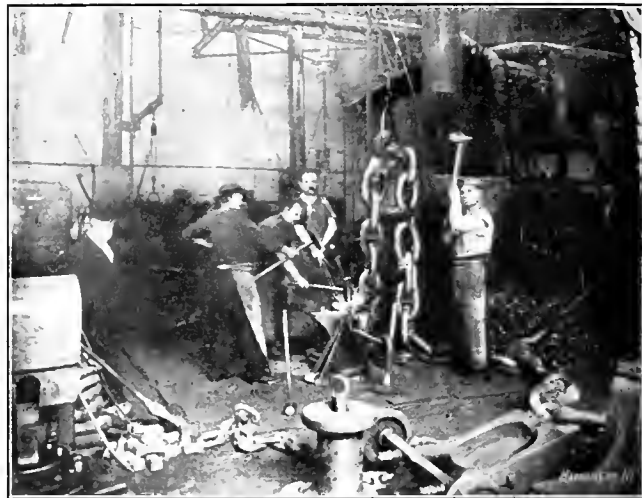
The Chain Gang at Work Welding a Link
